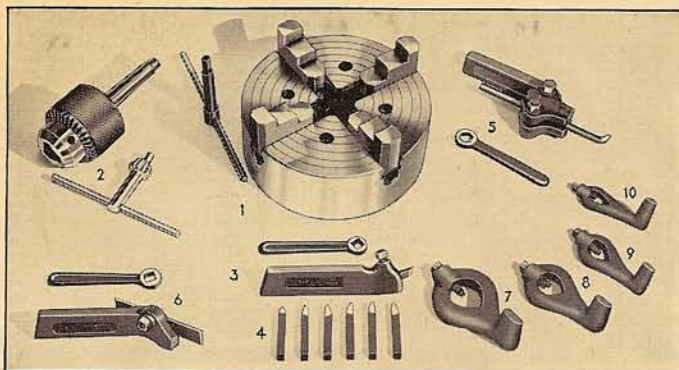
Practical Chuck and Tool Assortment for General Machine Work
